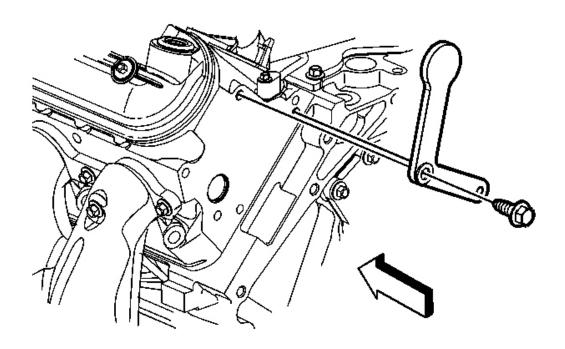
View Of Fuel Rail Stop Bracket & Bolt Courtesy of GENERAL MOTORS CORP.
